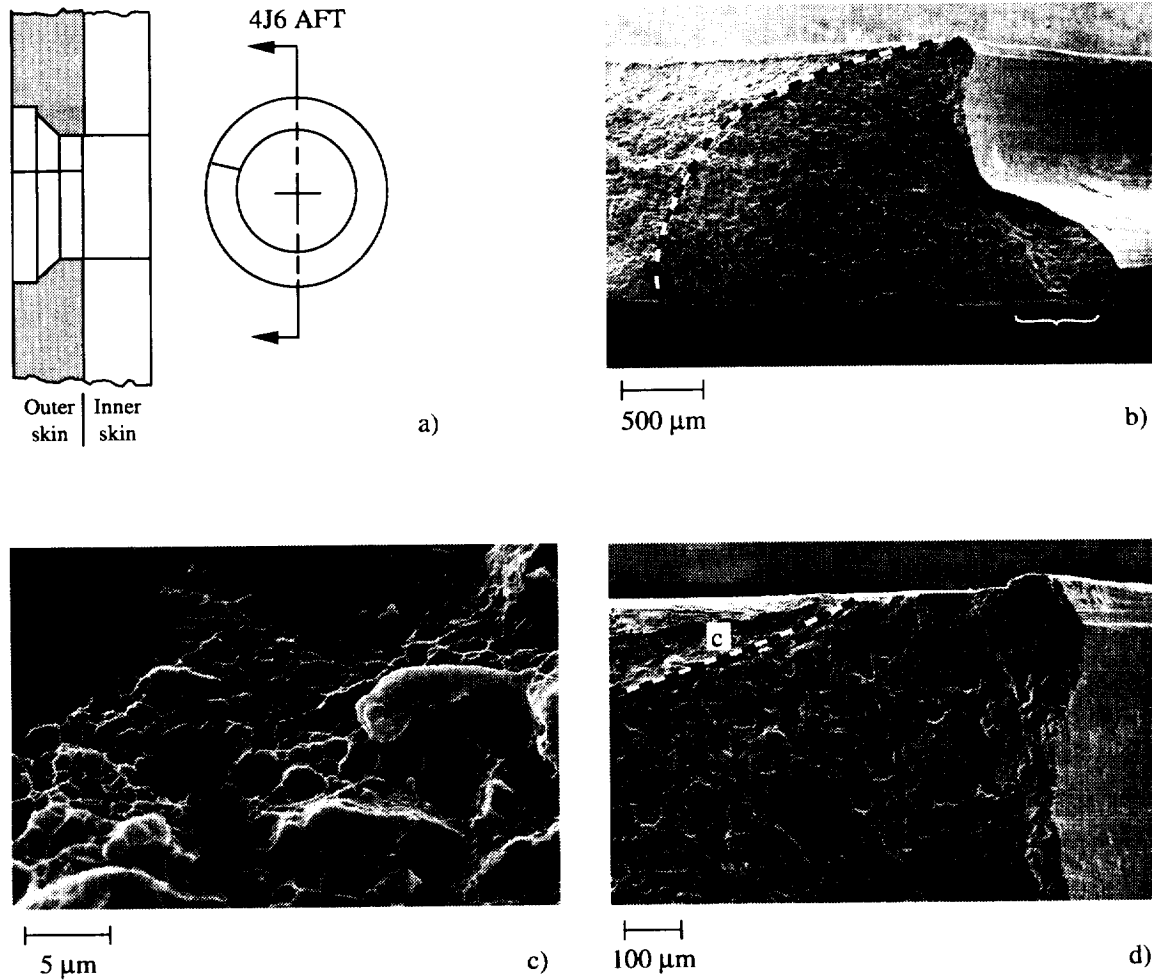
a) The schematic shows the rivet hole 4J6 configuration and the location of the outer skin fatigue crack oriented in the aft direction and about the 10 o'clock position. b) The SEM micrograph shows the fatigue crack fracture surface located at the outer skin rivet hole (right). The dashed line marks the fatigue crack front and the bracket marks the region of crack initiation. c) The SEM micrograph shows the ductile tearing morphology of the overload fracture surface at region "c" in Figure 11.11.d at high magnification. d) The SEM micrograph shows the fatigue crack front region (dashed line) as it intersects the outboard surface of the outer skin. The rivet hole is located to the right.
